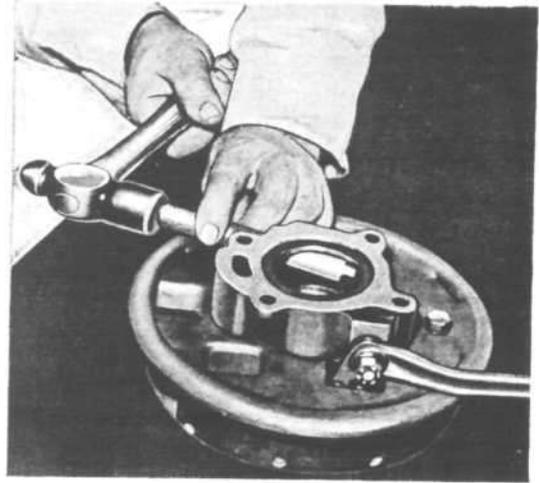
SPEEDOMETER PINION BUSHING DRIVER
